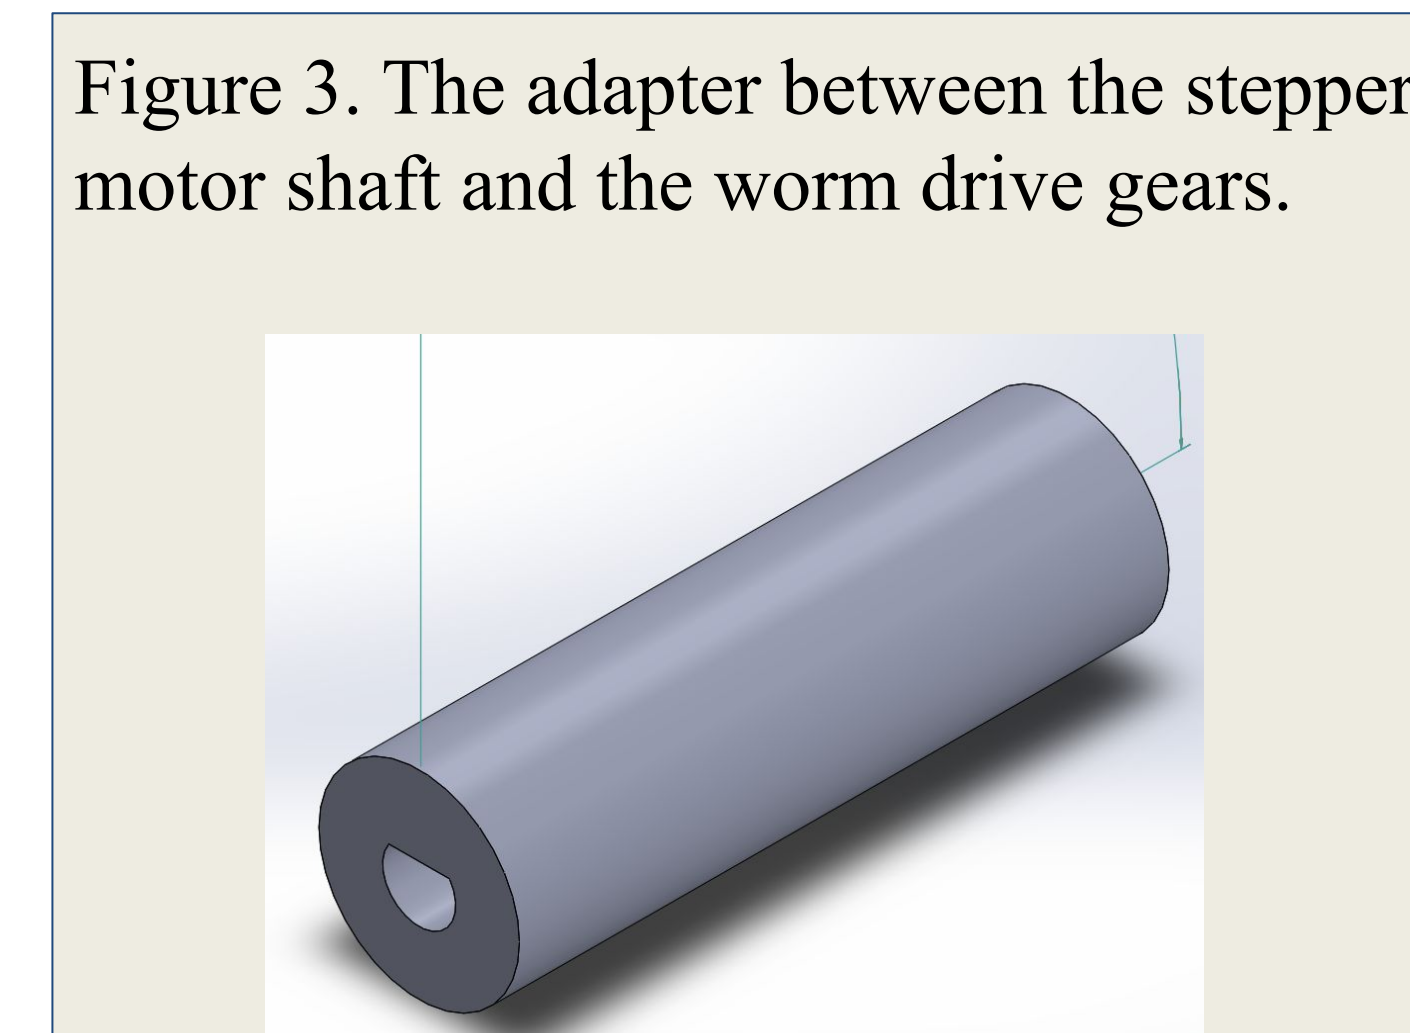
The adapter between the stepper motor shaft and the worm drive gears.
